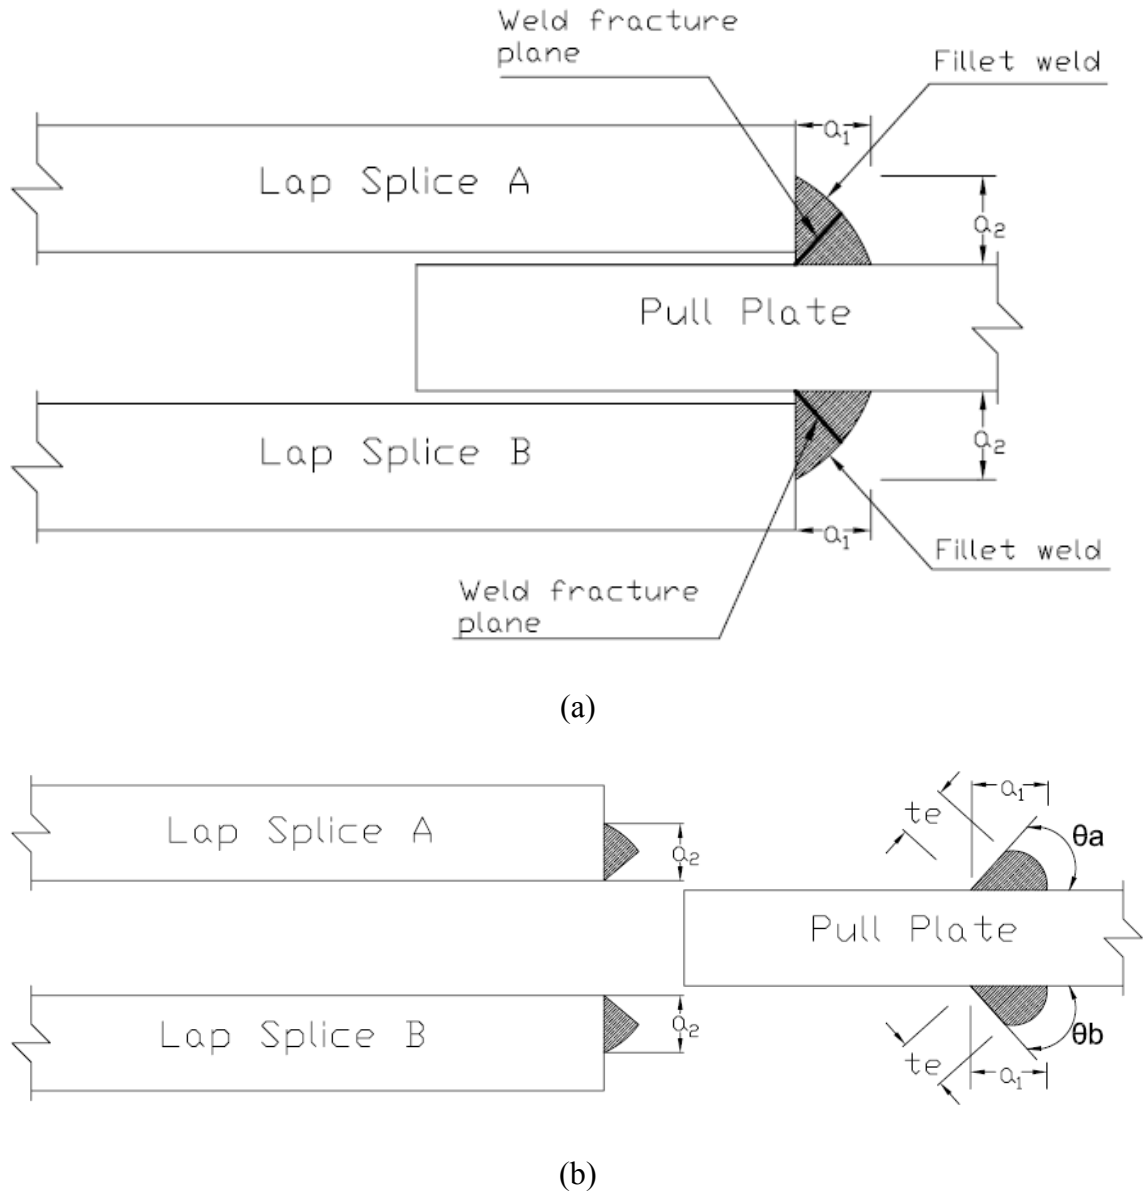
Schematic of the weld size measurements,  $a_1$ ,  $a_2$ , and  $t_e$  and the weld fracture angles,  $\theta_a$  and  $\theta_b$  made after testing each specimen: (a) Test specimen before weld fracture (b) Test specimen after weld fracture
